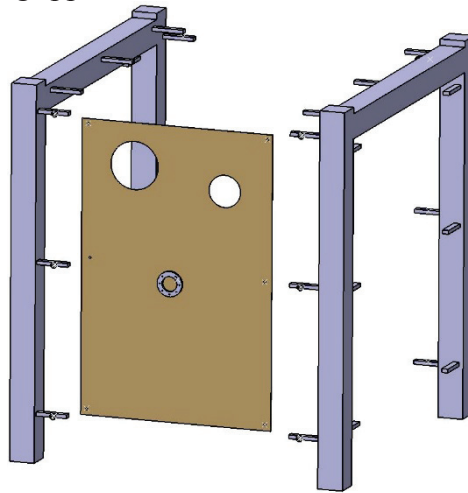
Alignment of the sheet metal part to the support frame and the robot mounting bracket
